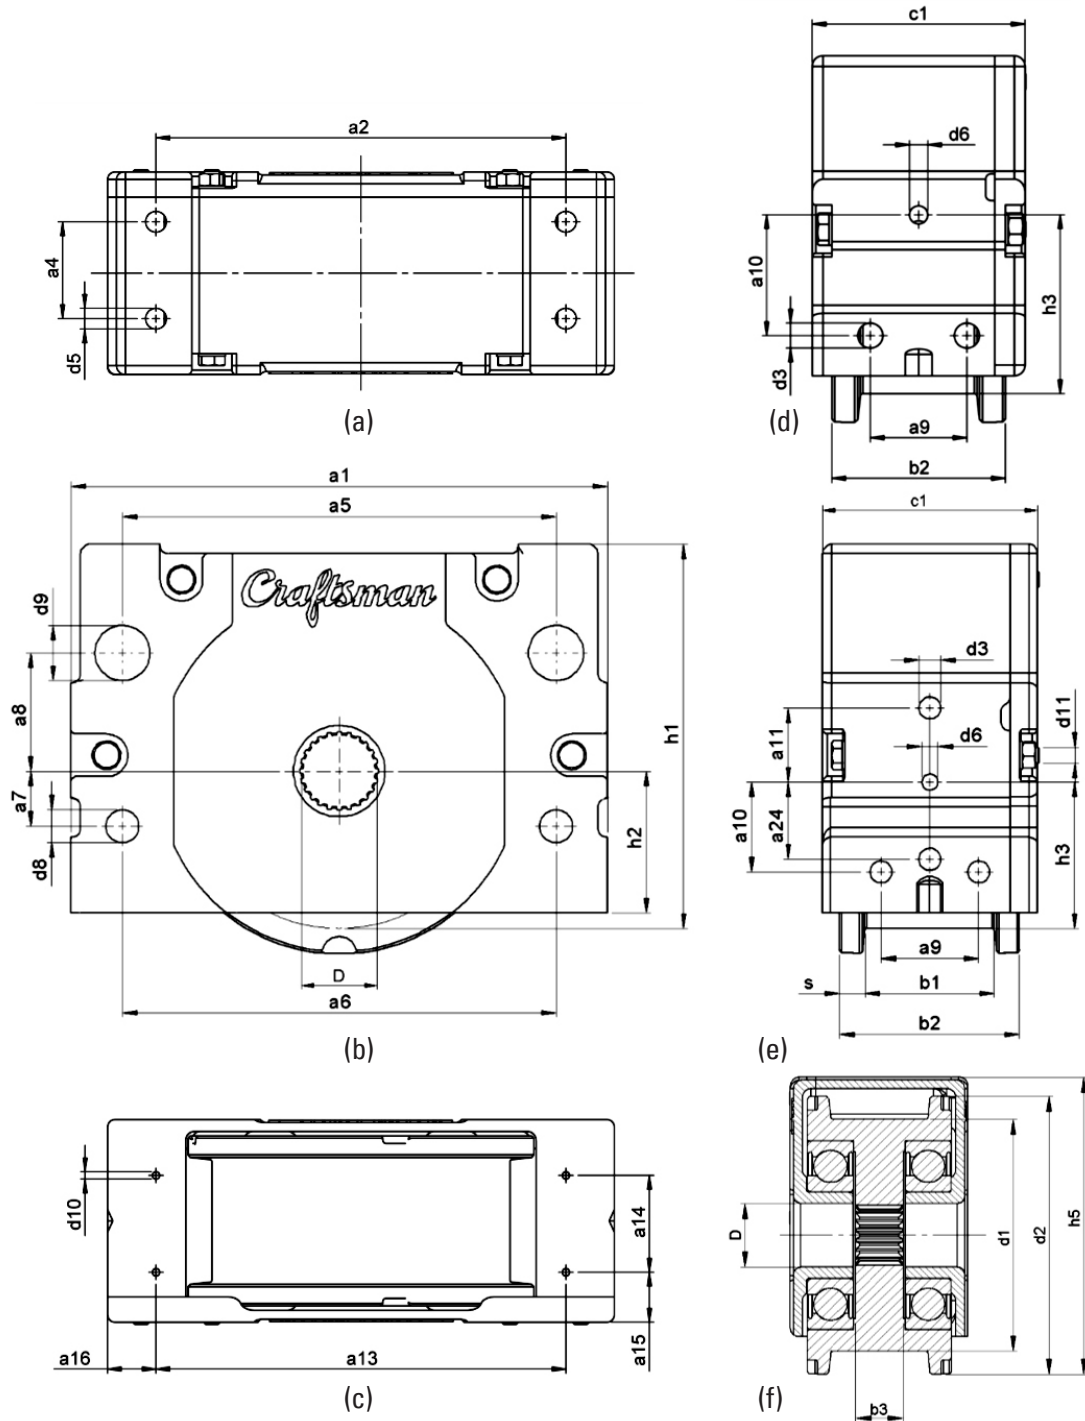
Wheel block dimensions CRWB 112 TO 200
